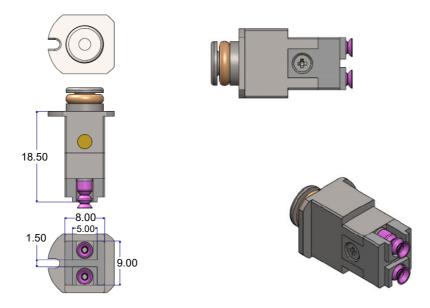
Suggested Power Tower Pickup Tool - Detail 1
